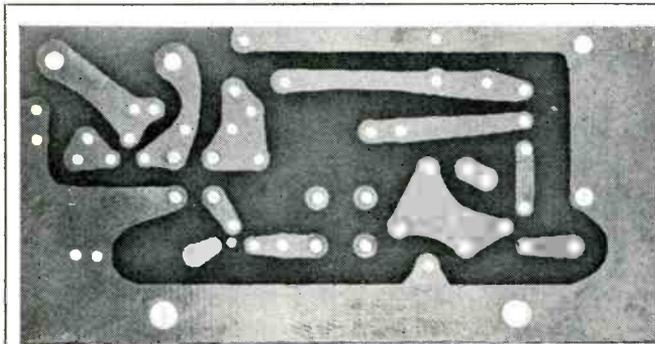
Actual size photograph of printed circuit board will guide you in making your own.
